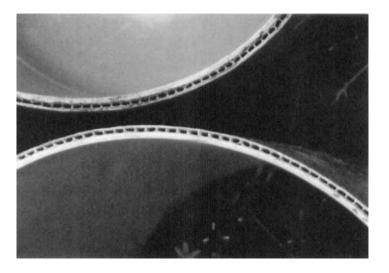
The layer coating fixed on the outer surface of the tank's wall.
